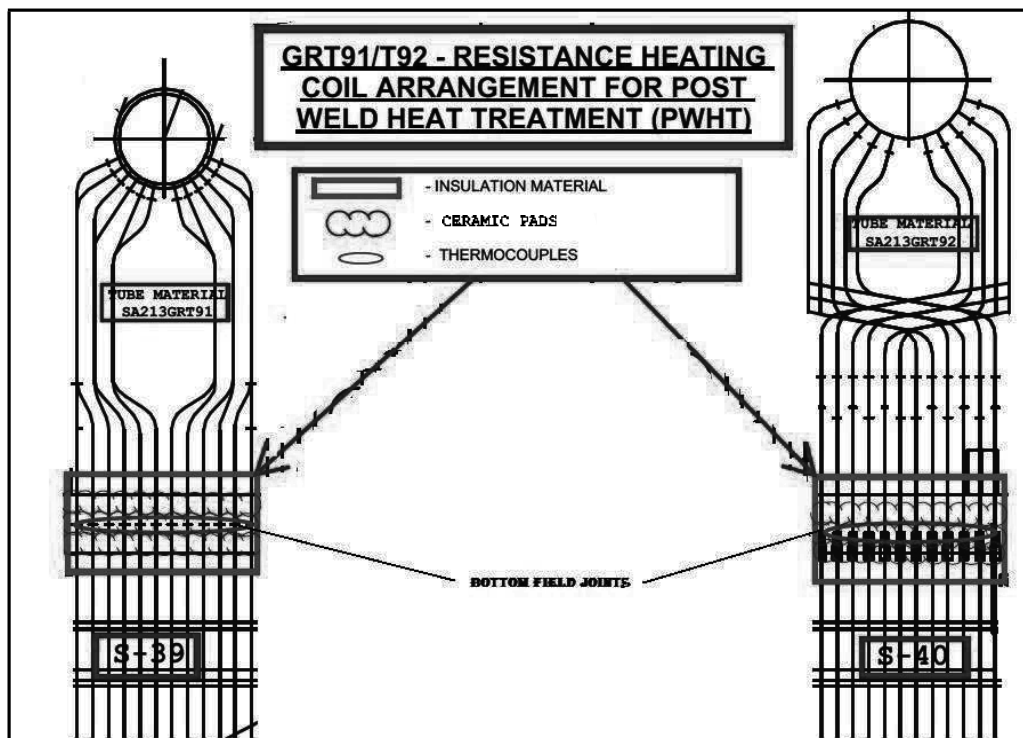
Resistance heating Coil arrangement for PWHT of T91/T92 tube assembly
